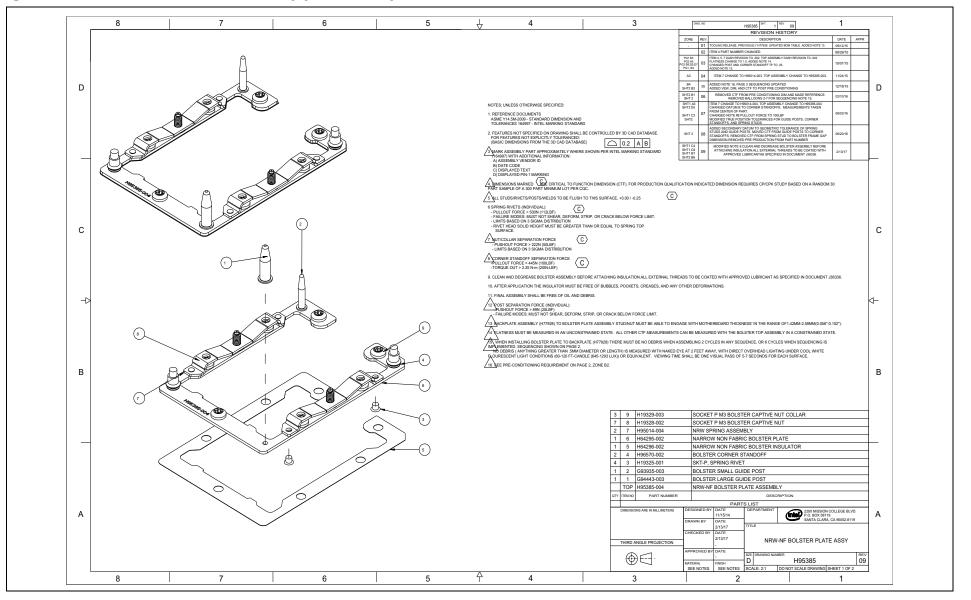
Narrow Bolster Plate Assembly (Sheet 2 of 2)
